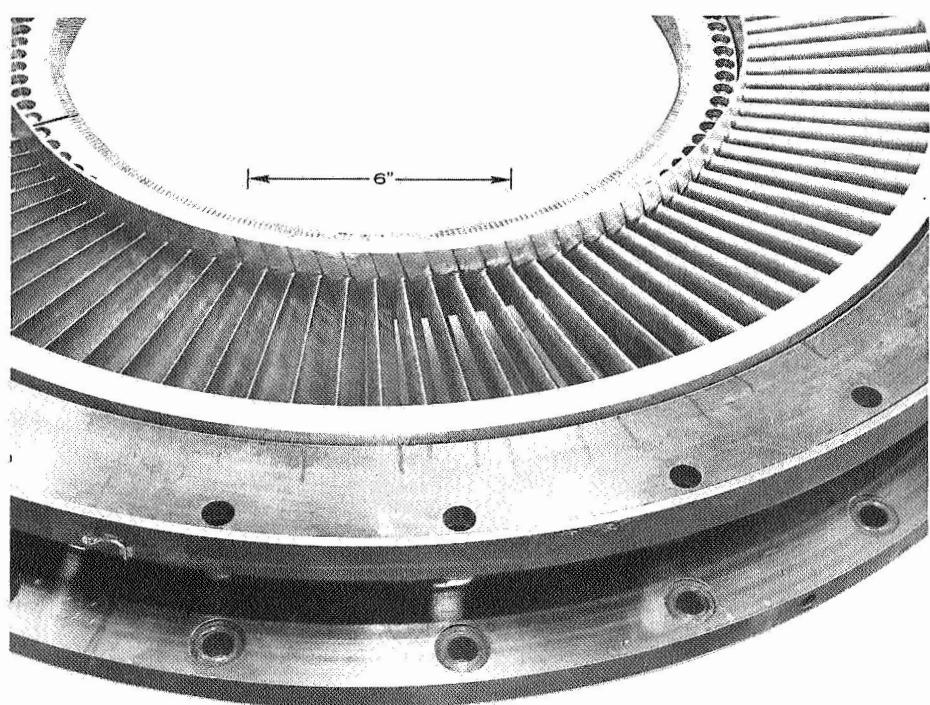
Stage Three Plain Stator Assembled in Outer Casing.
